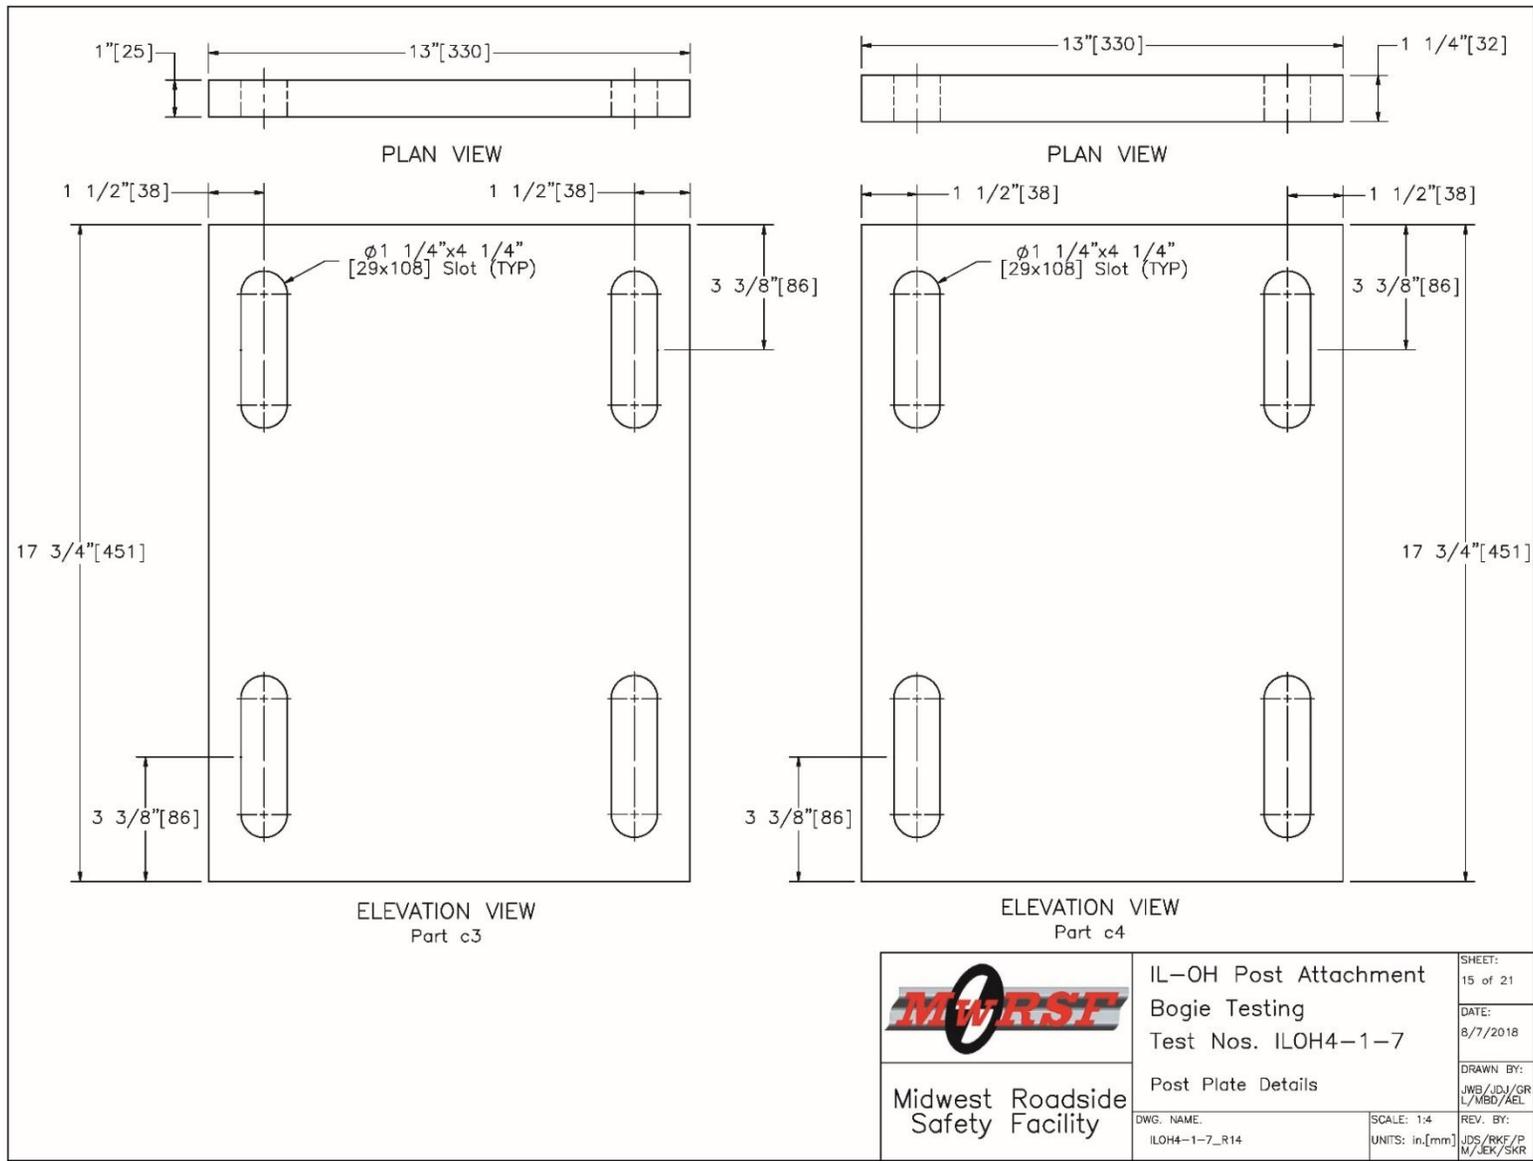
1-in. (25-mm) and 1 1/4-in. (32-mm) Singular Plate Attachment Details
